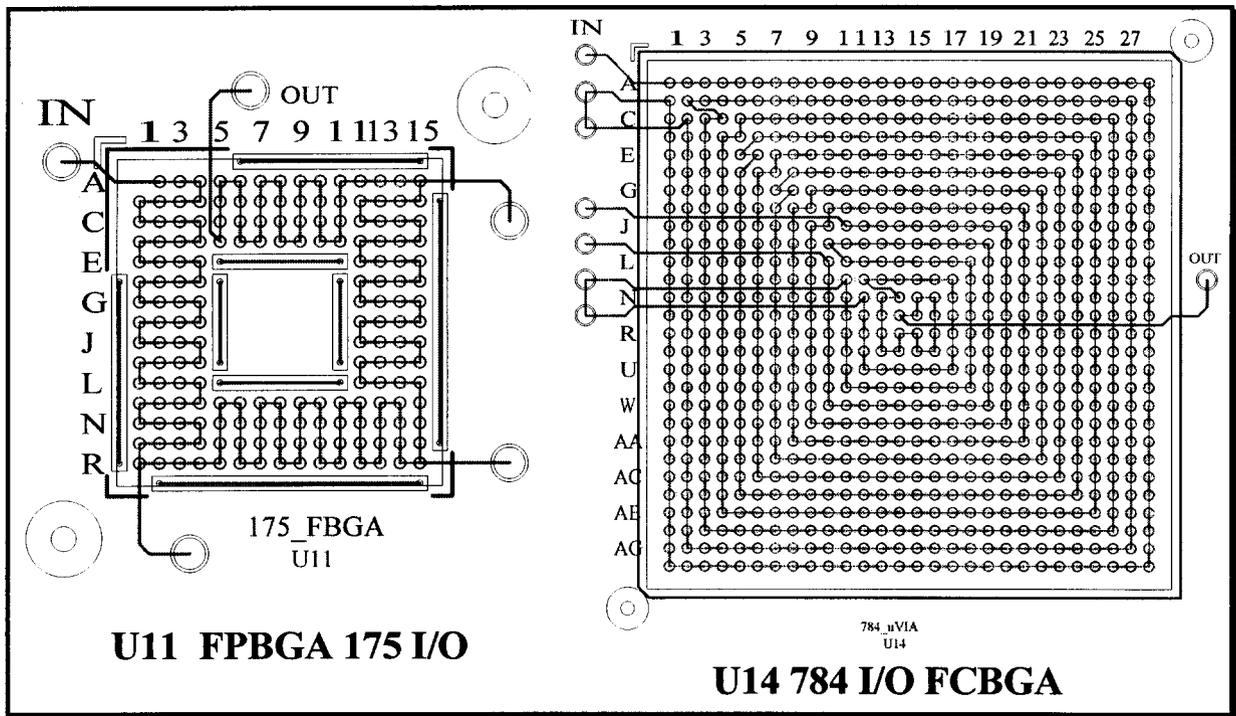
Package and board daisy chain patterns for a TV-2 flip chip BGA (FCBGA) and fine pitch BGA (FPBGA) with probing pads for failure diagnostics
